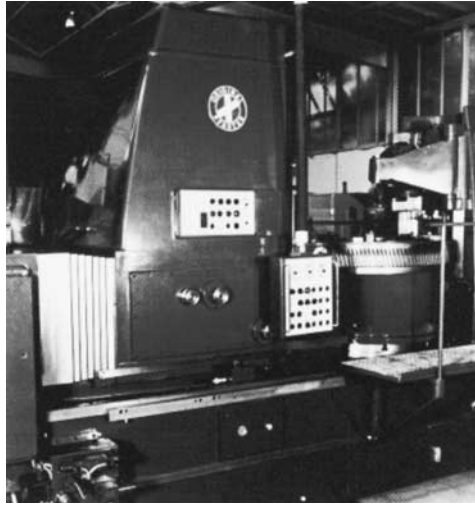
Drive of a hobbing machine. (*Siegling.*)
